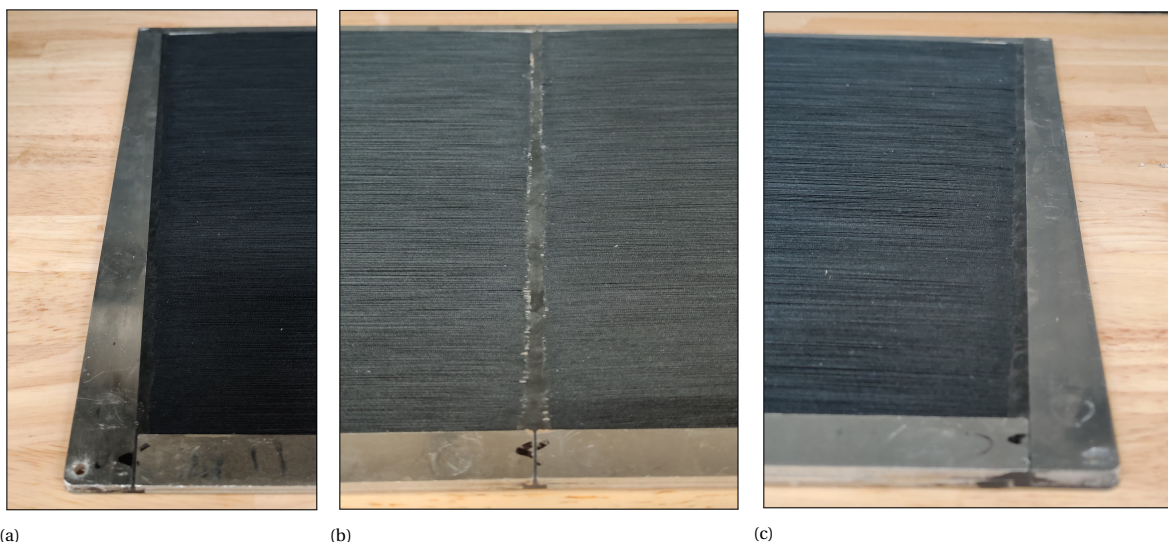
Leading edge (a), mid (b) and trailing edge (c) locations finished with moulding clay.
